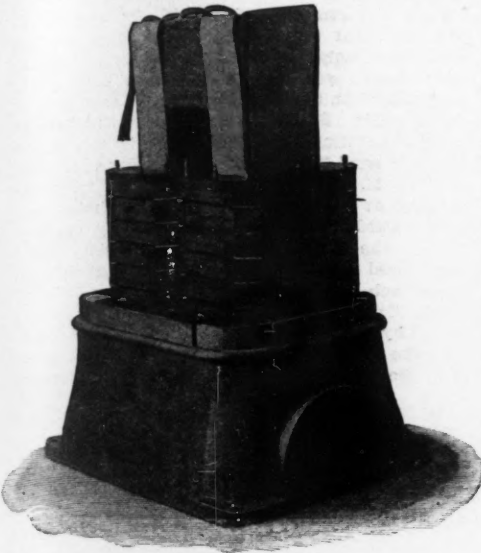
Building Up the Core, Showing Assembled Coils in Place and Core Partially Built Up.
